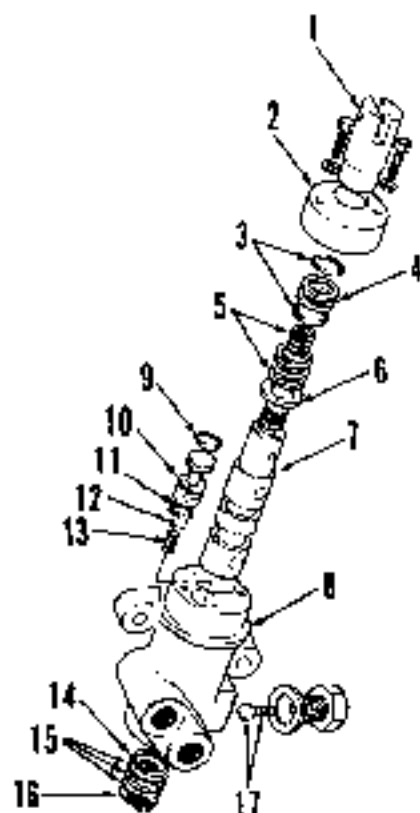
Exploded view of steering control valve used on Models MF240 and MF250.
